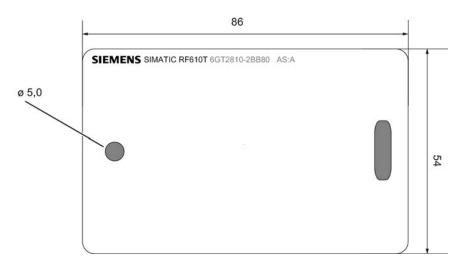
Dimensional drawing of SIMATIC RF610T
